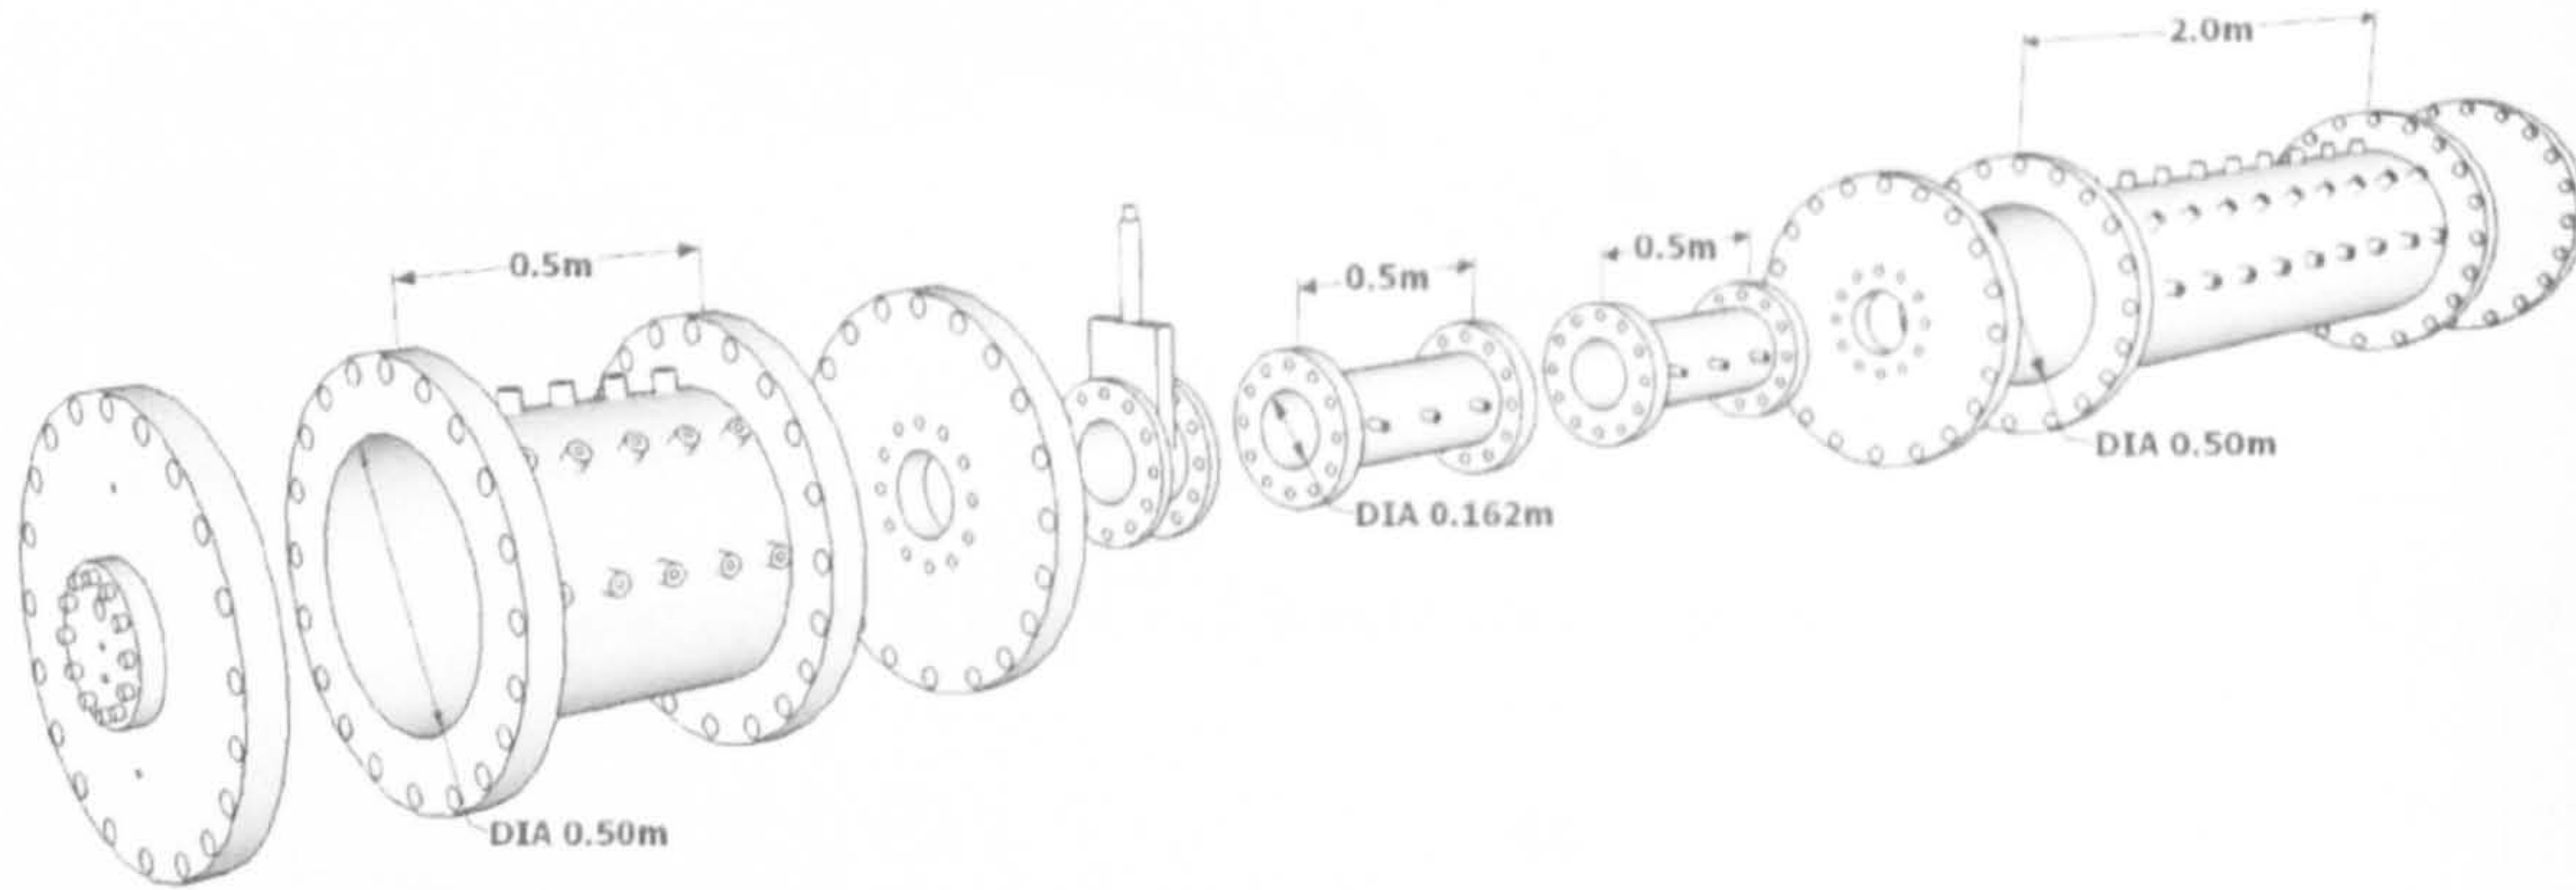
Schematic drawing of test-vessel 4: Interconnected vessel geometry.
